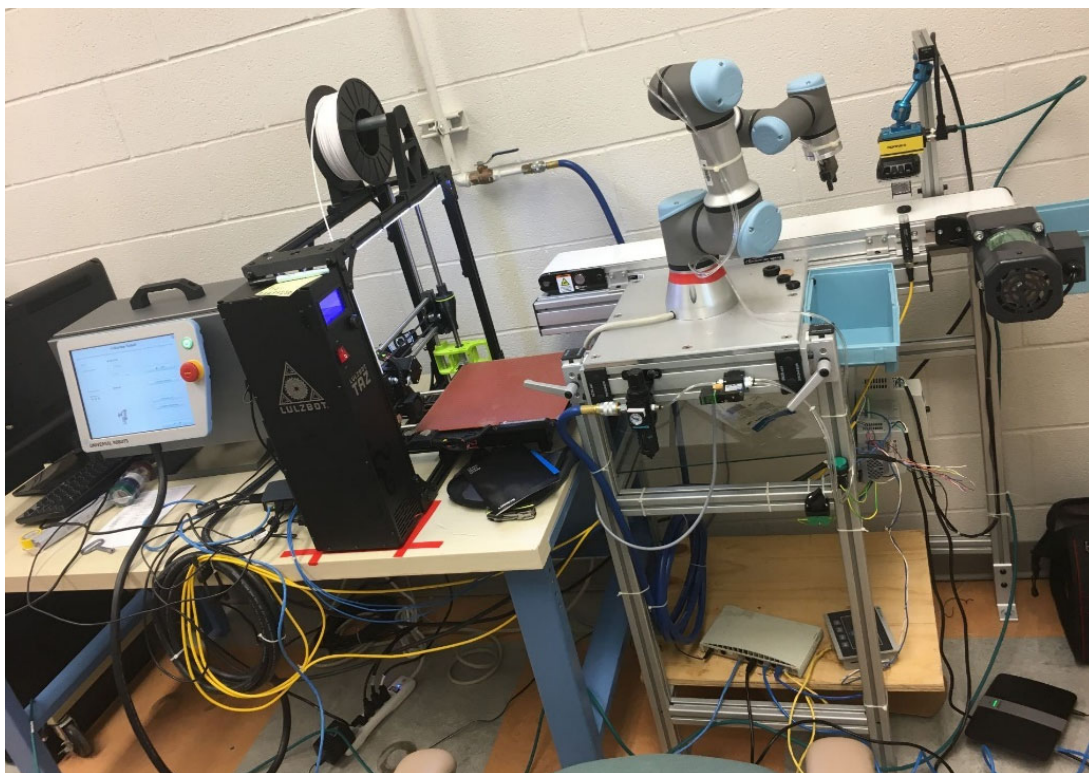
Automation workstation for inspecting 3D printed parts
